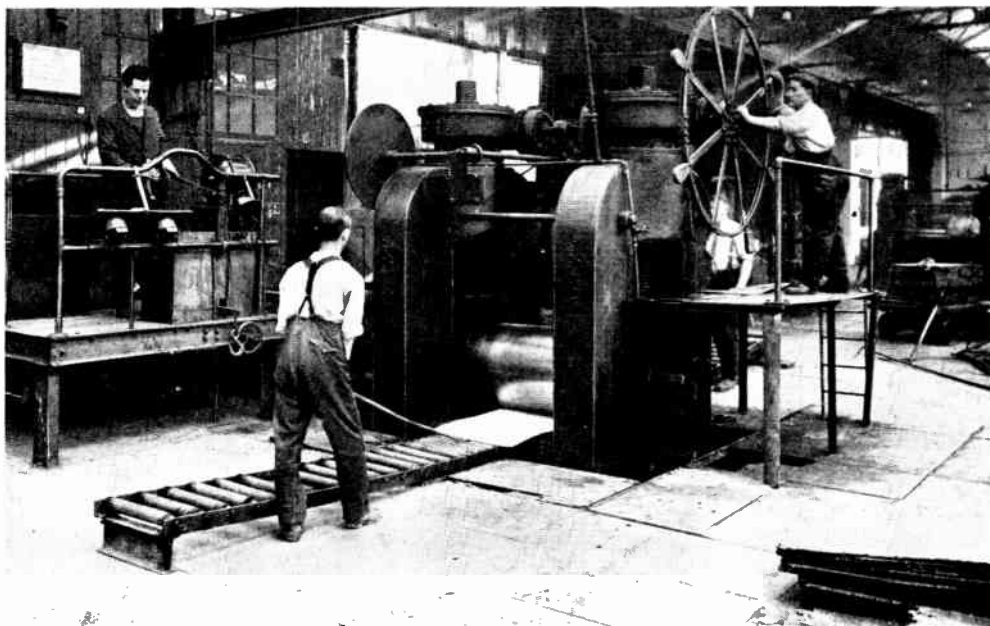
REVERSING MILL FOR ROLLING SHEET NICKEL. (Henry Wiggin & Co., Ltd.)
